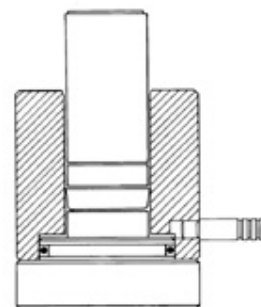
Drawing of a standard anvil die used for making the PE pellet.
